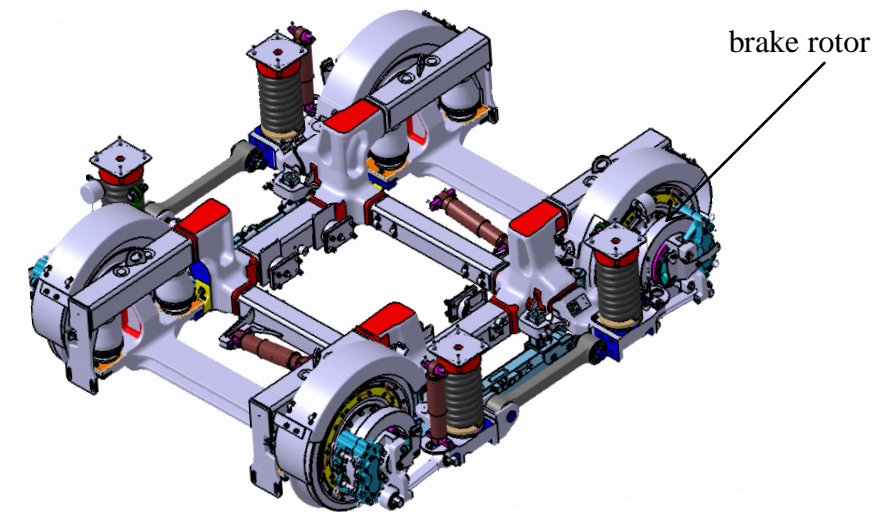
wheel mounted disc brakes of unpowered bogie.
